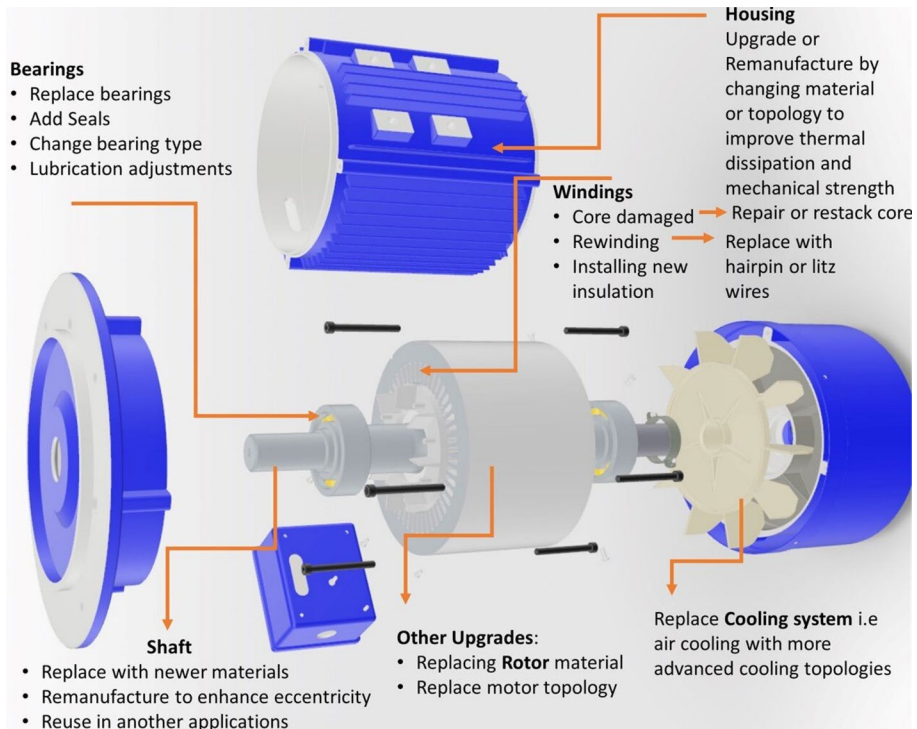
Example of disassembly and component-wise enhancement for an AC induction motor
